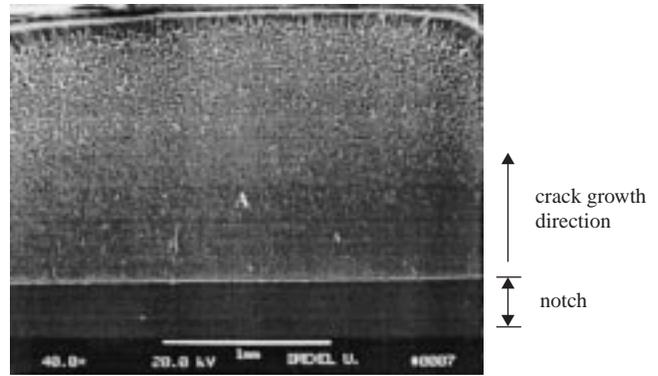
General view of the fracture surface of a specimen at 10% yield stress, illustrating brittle failure.
